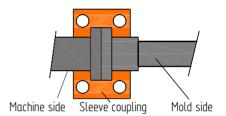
Principle of ejector sleeve coupling (for large molds)
